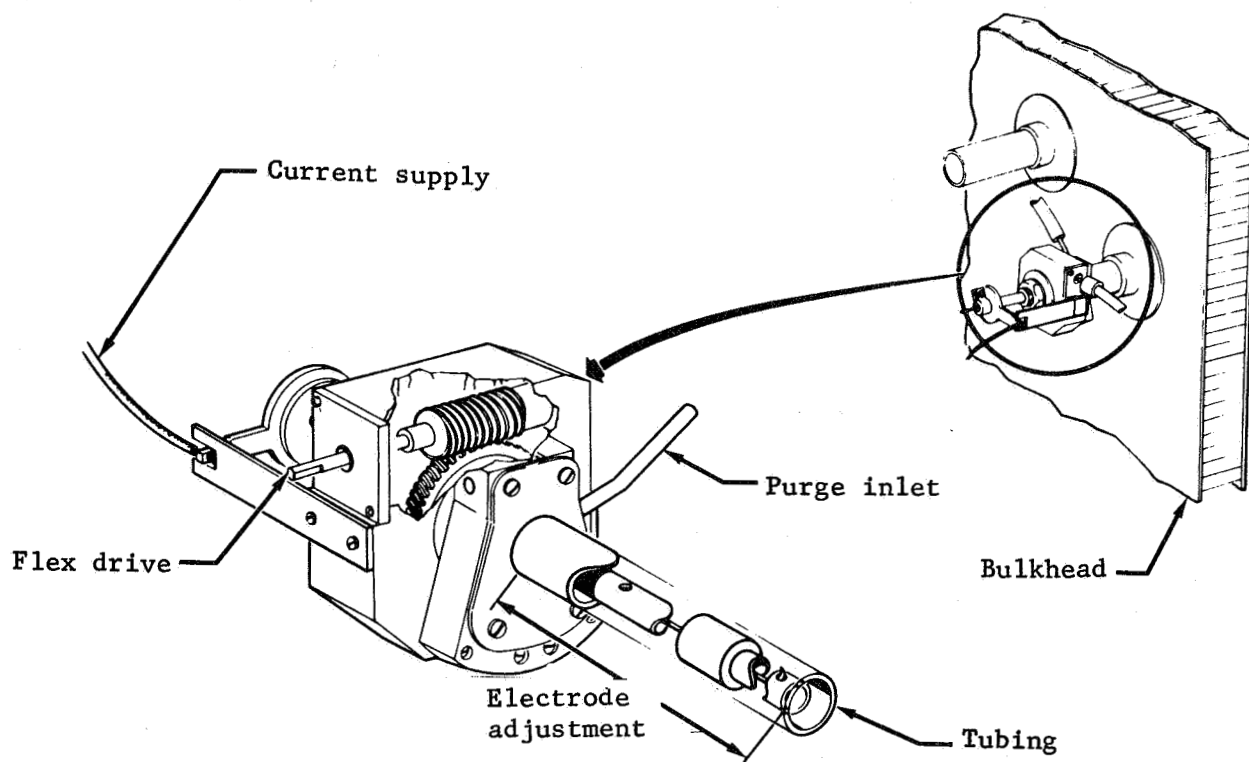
INTERNAL WELDING TOOL FOR GTA WELDING STAINLESS STEEL TUBING (REF.34)
